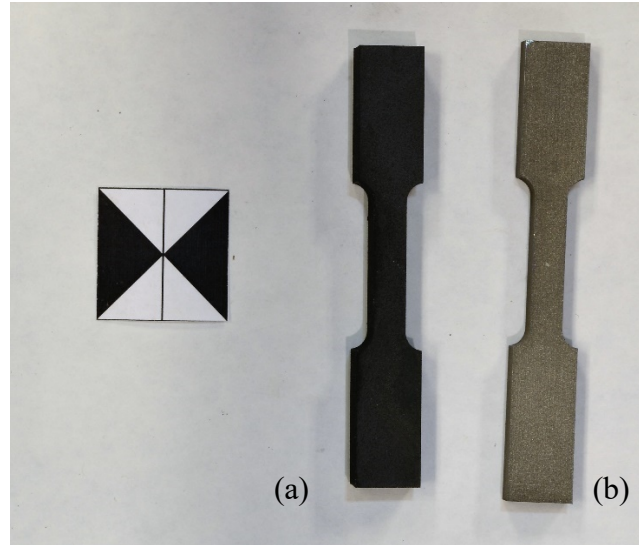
Additively Manufactured IN625 Tensile Test Samples: (a) horizontally printed and annealed, (b) vertically printed, not annealed, not used for testing
